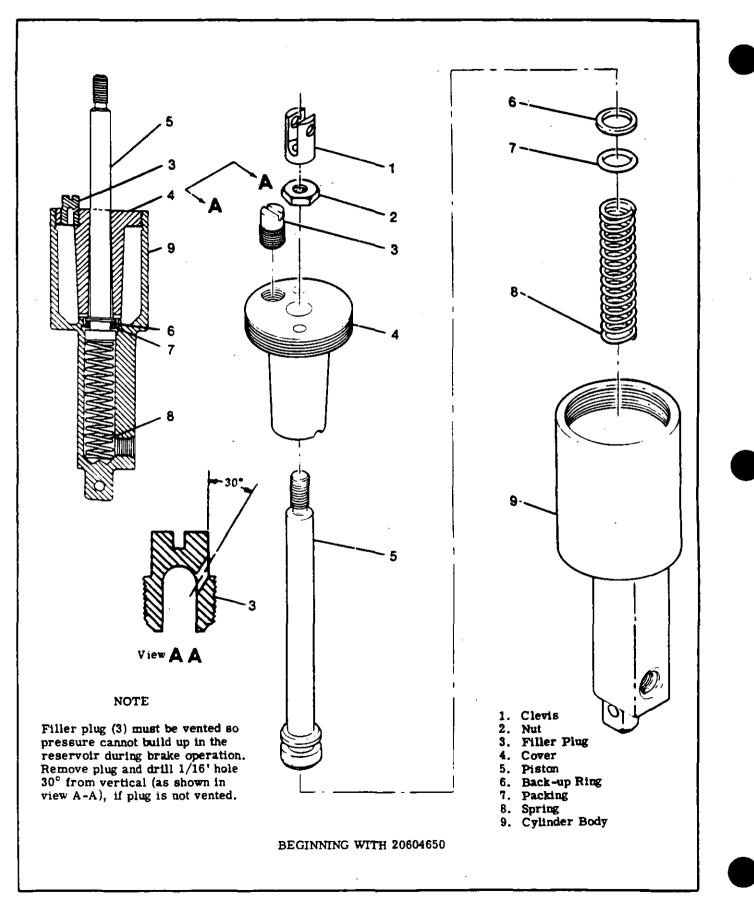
Brake Master Cylinder (Sheet 1 of 2)
